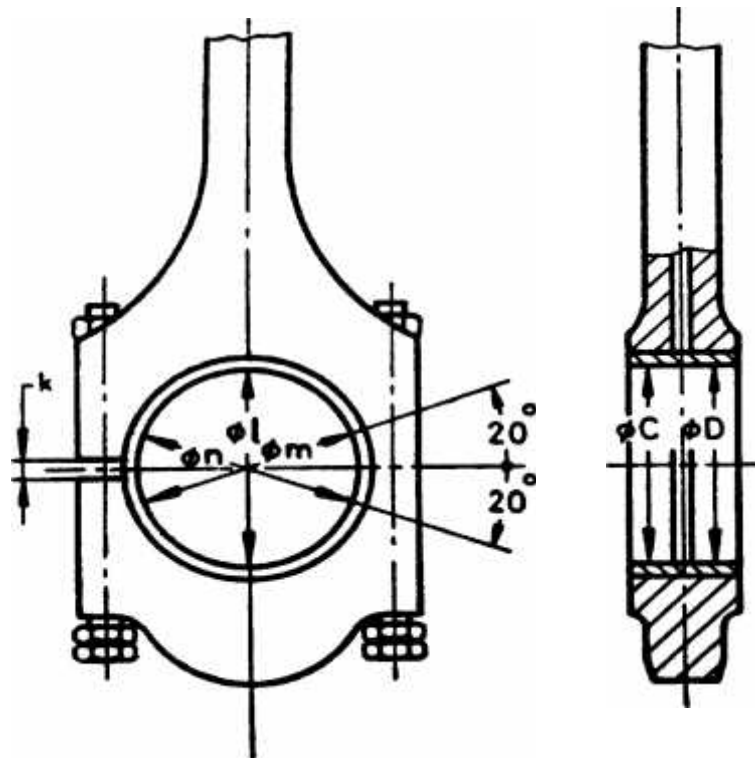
Measurement of connecting rod bearing (IS standard) [56]
